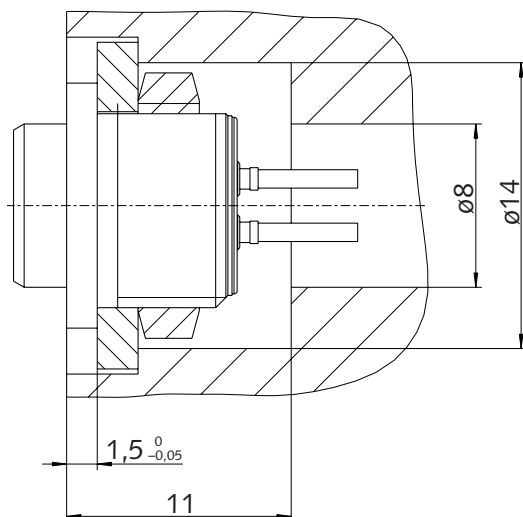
Installation dimensions for negative contact element Type 1714B2 with retaining plate Type 1419 and M10 nut
